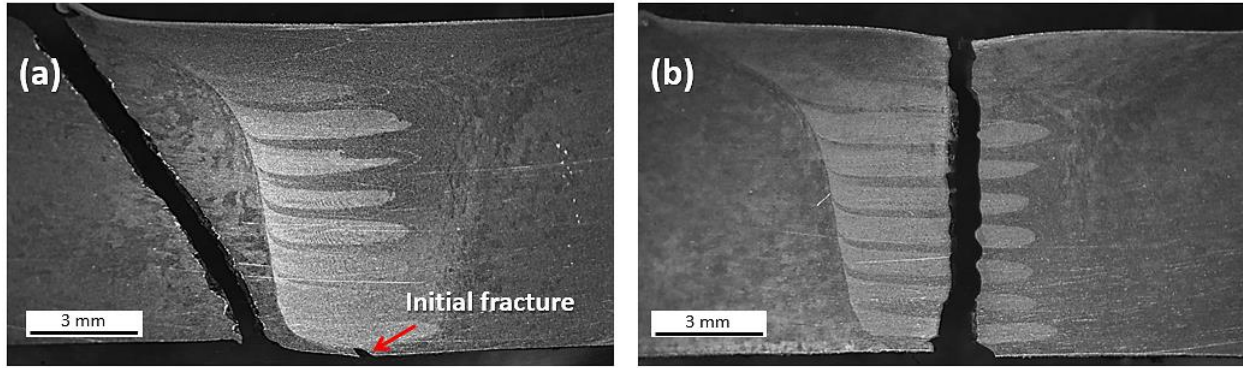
Fracture initiating at the kissing bond in both (a) aligned sample and (b) 0.2 mm eccentric sample.
